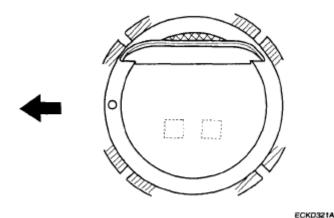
Locating Coolant Inlet Pitting And Thermostat Courtesy of HYUNDAI MOTOR CO.
